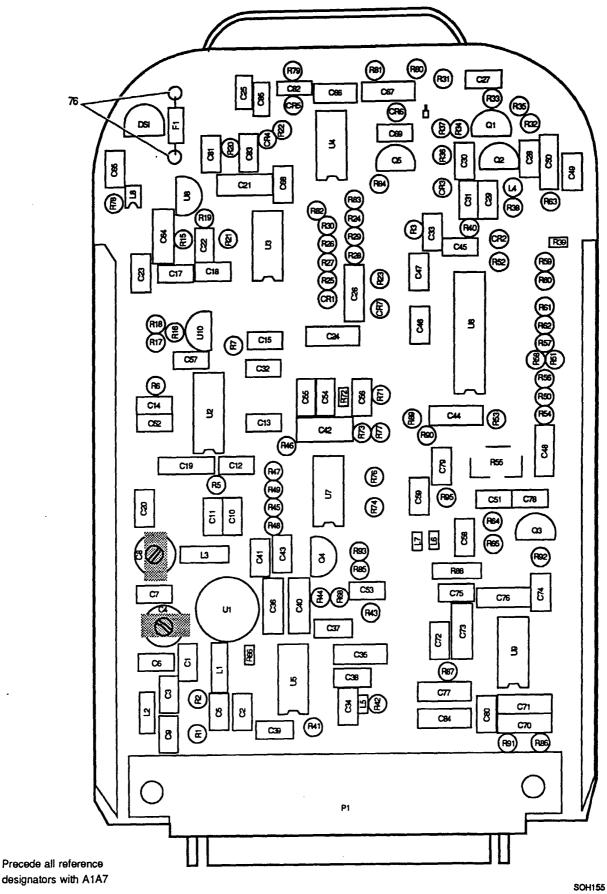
A7 RE Product Detector Board Assembly (Sheet 1 of 2)
